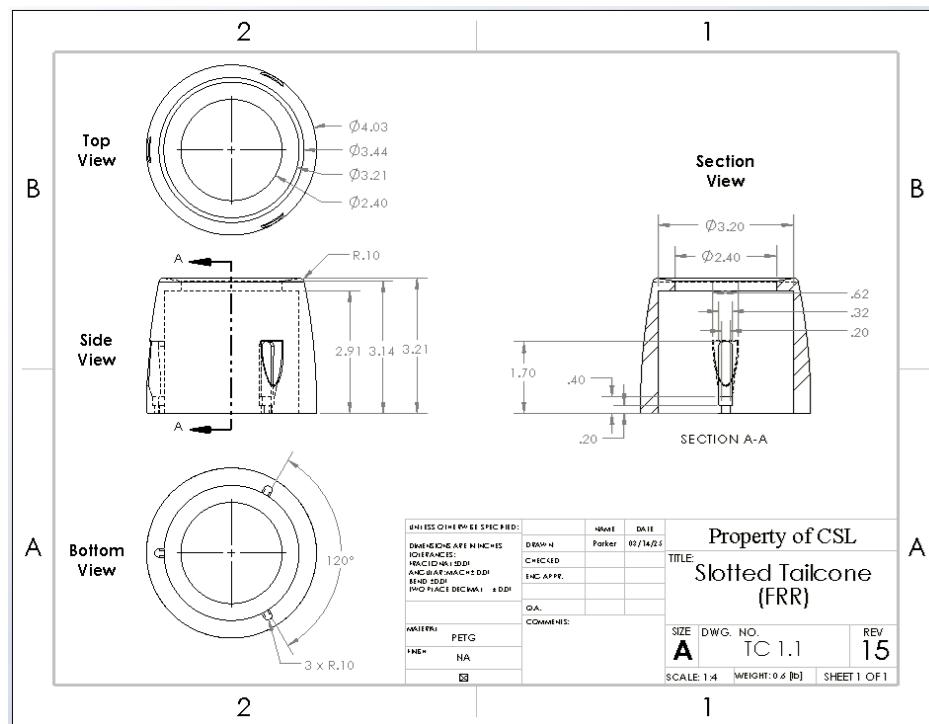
Dimensioned SolidWorks drawing of the motor retention tail cone.
